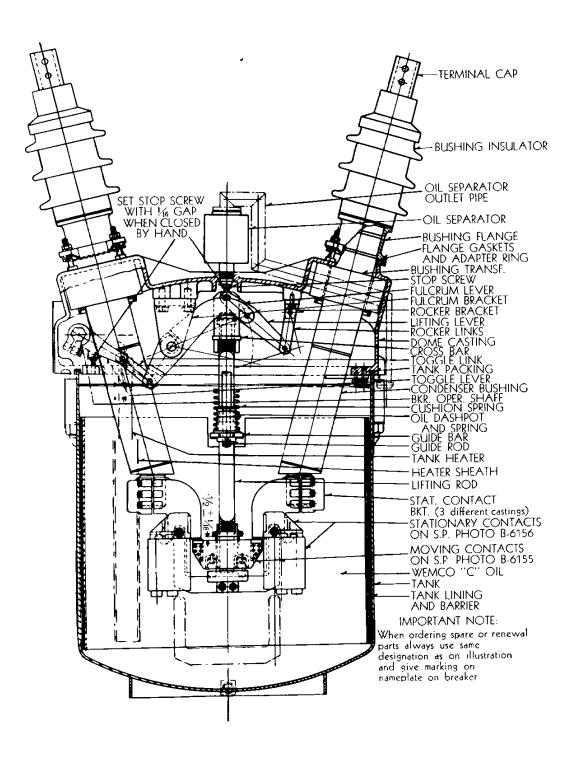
4,000 Amp., 15,000 Volt, Type BNO-B Breaker—Sectional View
